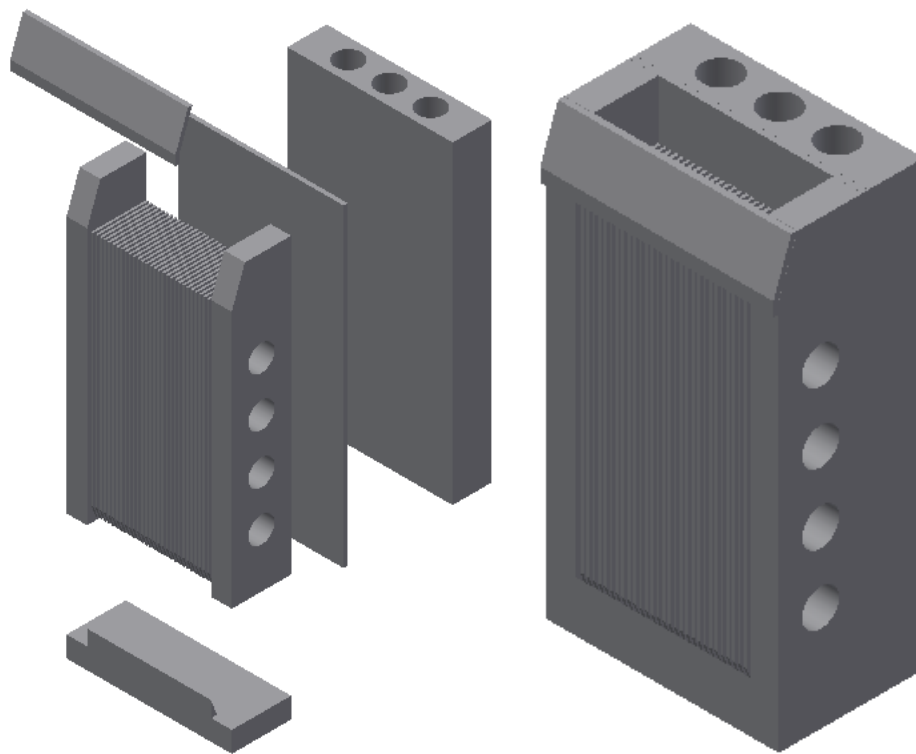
CAD drawing of the new prototype vertical trench design. The left figure is the explosive view and the right figure is the assembled trench.
